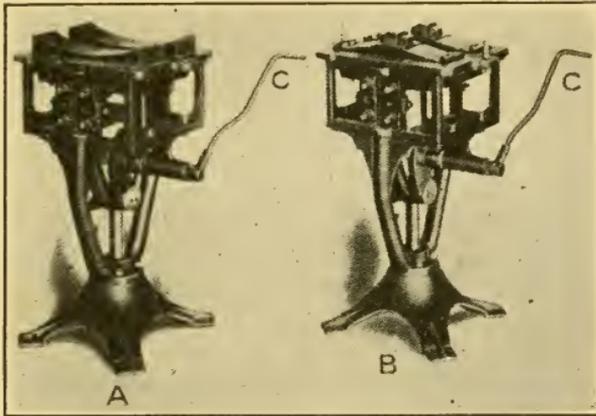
Stripping plate molding machines. A for making drag and B for making cope.
